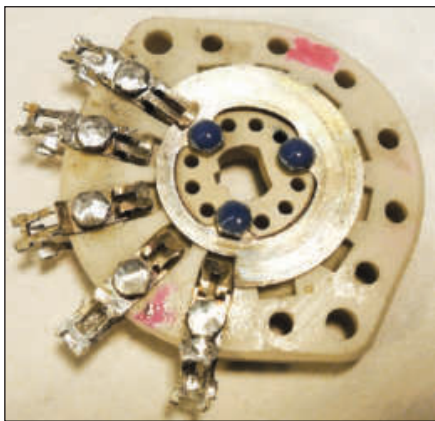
The rebuilt wafer, with burnished solder "caps" on each of the nuts securing the contact lugs and a drop of thread-locking compound (still drying) on each of the nuts securing the rotor components. [Rick Lindquist, WW3DE, photo]
